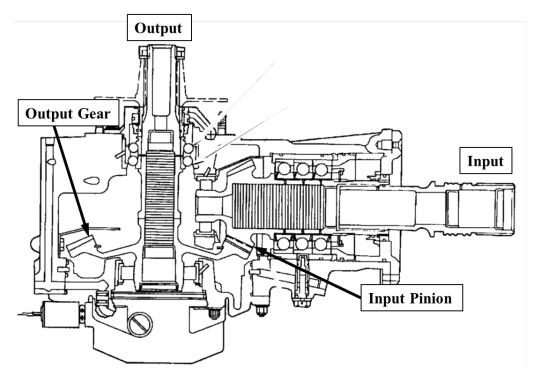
U.S. Army Helicopter Nose Gearbox showing input pinion and output gear locations (Ref. 5).
